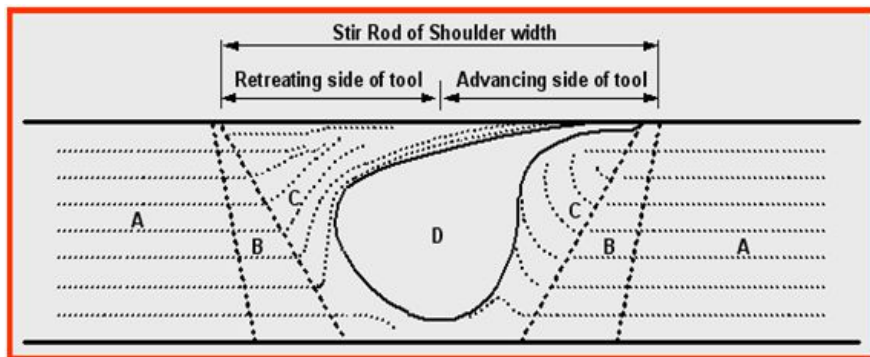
Schematic of Friction Stir Welding
